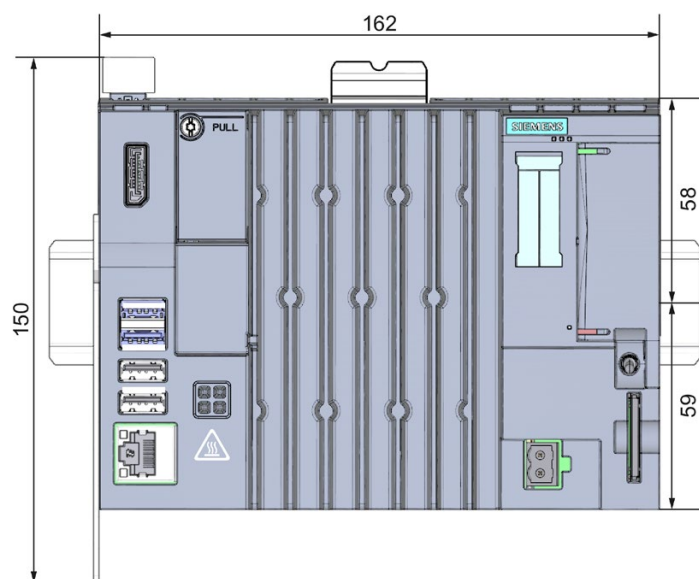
Dimension drawing CPU 1515SP PC2, front view
